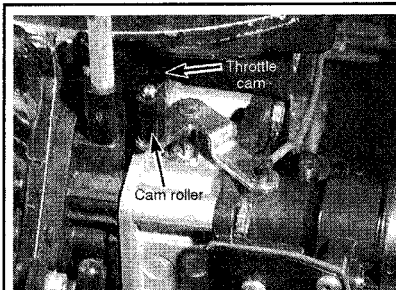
move the throttle linkage forward until the throttle cam JUST touches the cam roller
